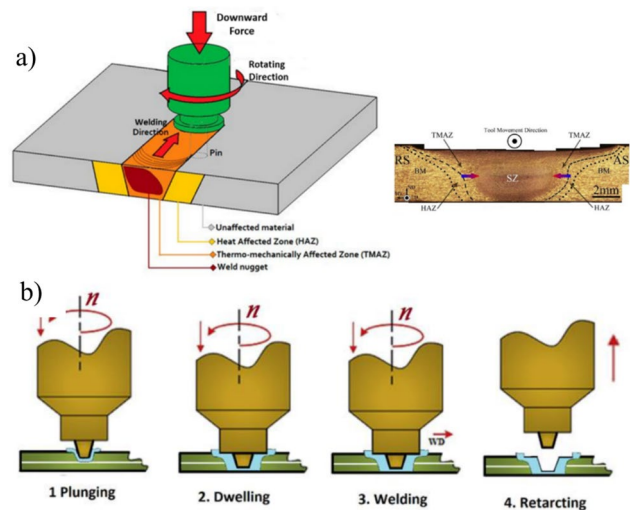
a FSW process schematic and welding zones [14] and (b) FSW process steps [58]
